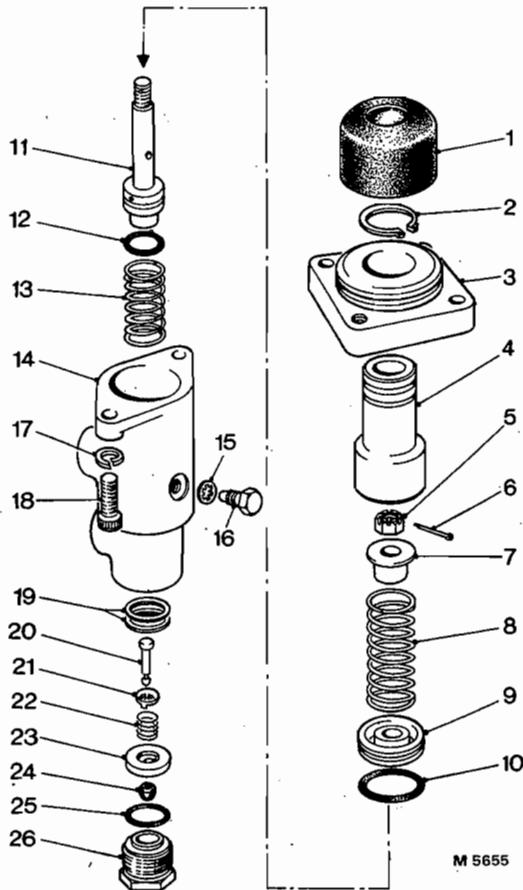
EXPLODED VIEW OF CONTROL VALVE
